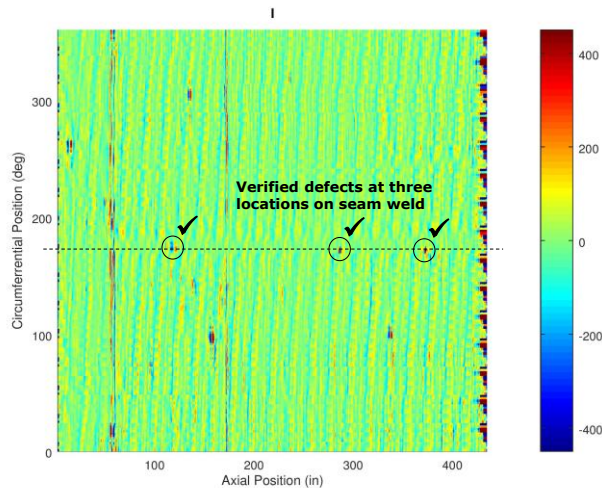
THREE VERIFIED NATURAL CRACKS ON THE WELD
